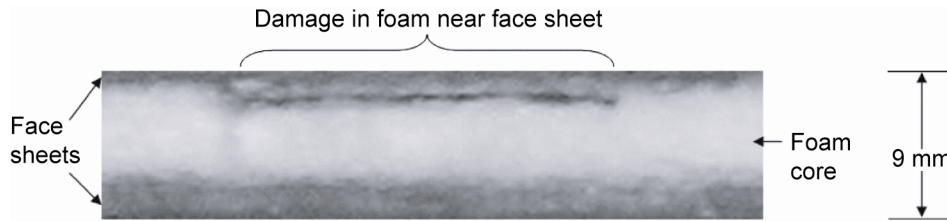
A side view of the sandwich material in the flat panel illustrating the intentional damage inserted into the foam core.
